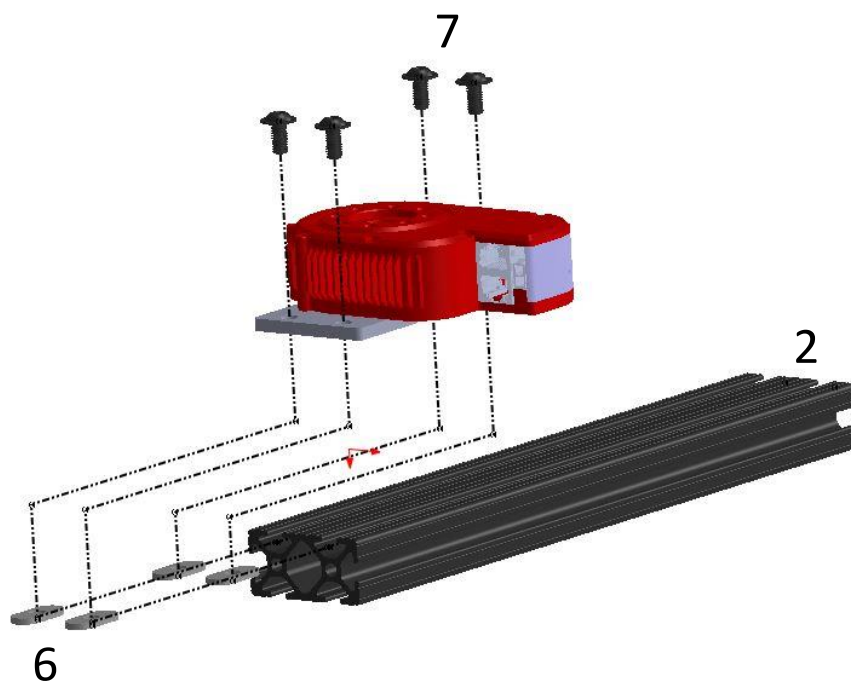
Attaching the Assembly in Fig. 1 to Aluminum Extrusion
